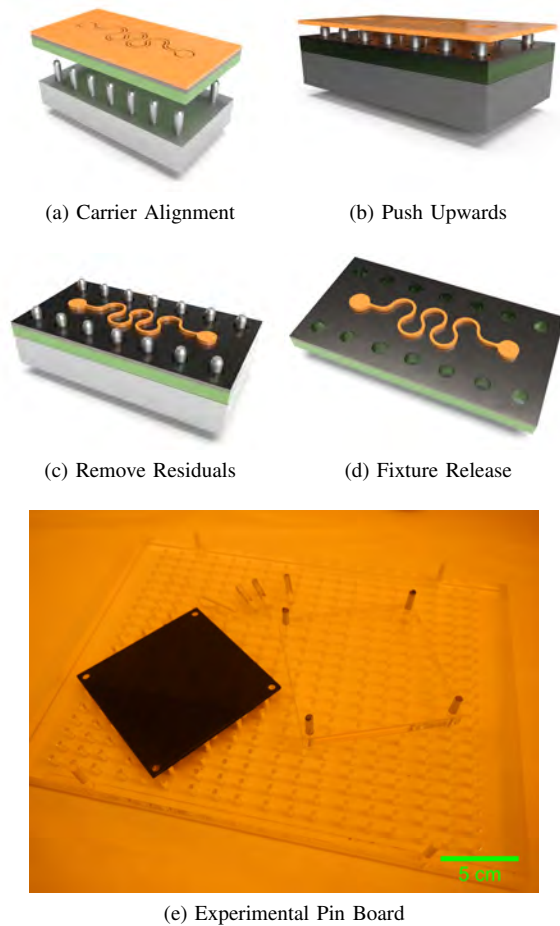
Removal of the circuit residuals using a pin board: (a) Carrier board alignment over the pinboard; (b) Pressing the carrier down on the pins lifts the residuals away from the carrier board; (c) Residuals are removed by flipping the fixture upside-down or using a blast of compressed air. (d) Releasing the board from the fixture. (e) Alignment and pinboard tool for A4-sized circuit boards made out of clear plastic, with an alignment tool and carrier board for smaller 10 cm by 10 cm samples resting on top. Transparent plastic is used to provide to enable inspection of the result before releasing the board from the fixture.
